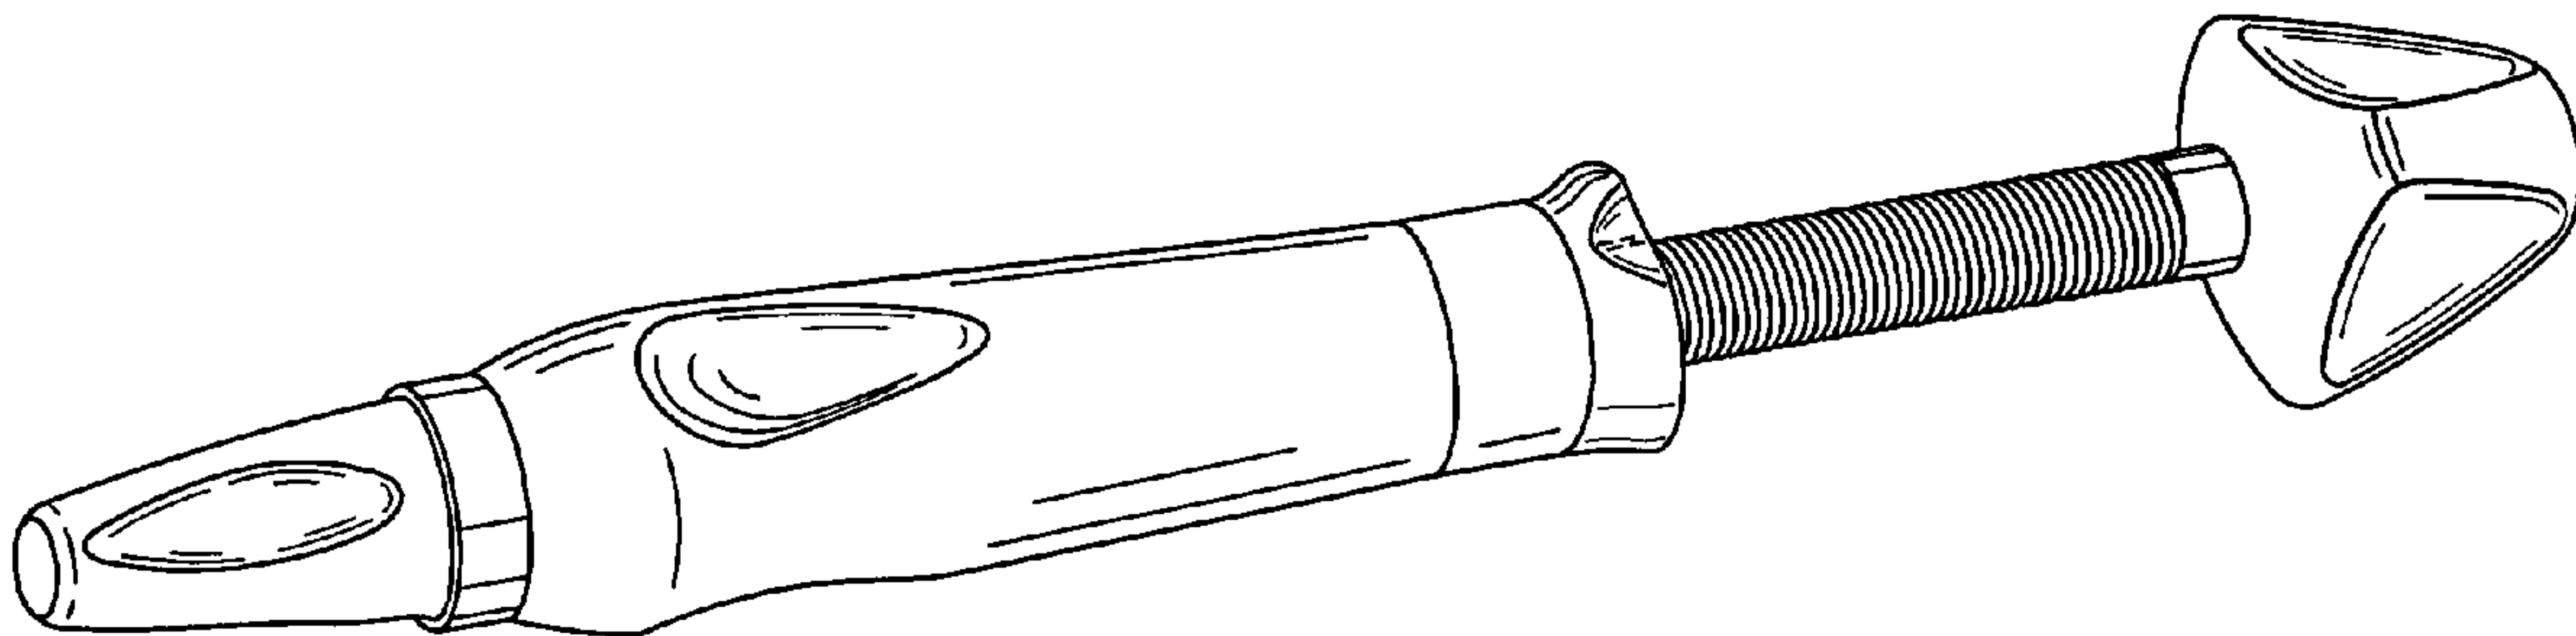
shows another elevation side view thereof, this view being similar to FIG. 18 but rotated about 30° counter-clockwise when viewed from the bottom;
